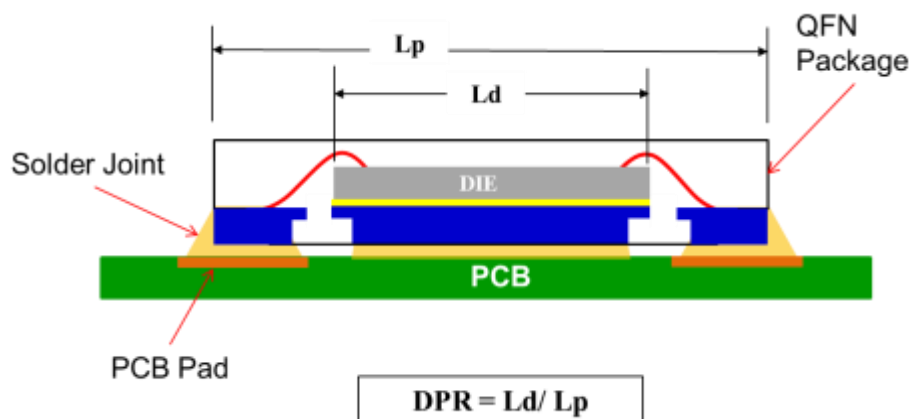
Die-to-package ratio of a QFN package mounted on PCB.
